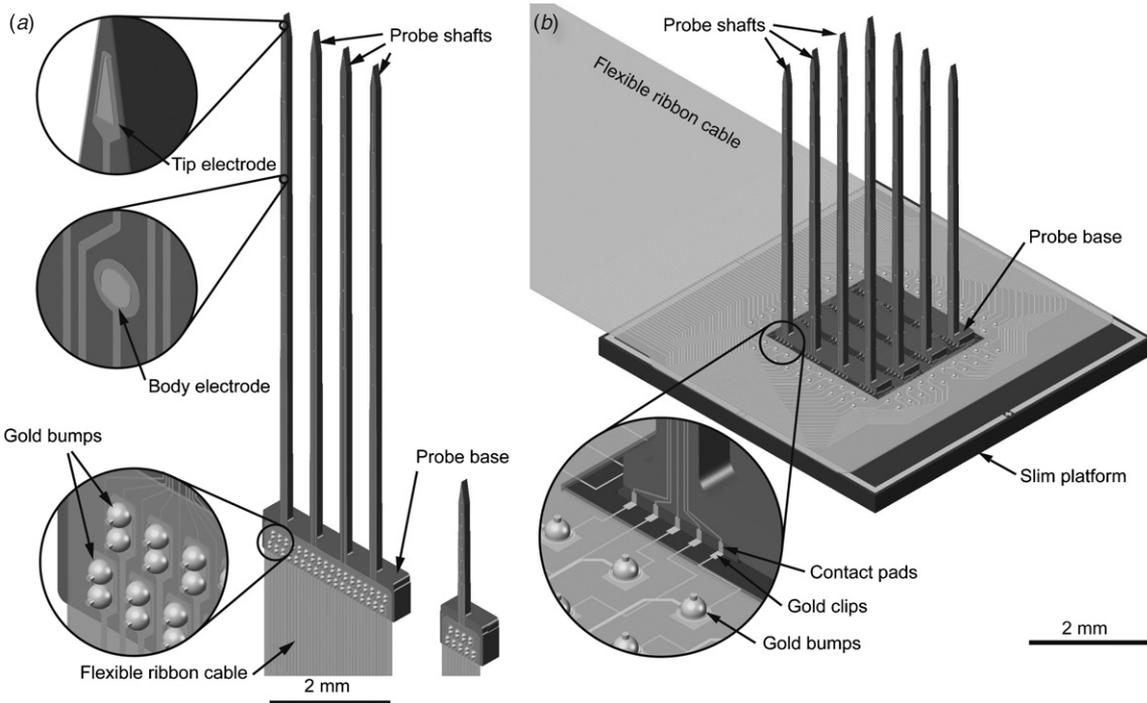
Schematic of probe assemblies: (a) probes with four shafts and with a single shaft directly connected to a highly flexible ribbon cable and (b) slim platform-based 3D-probe array with 4×4 shafts.
